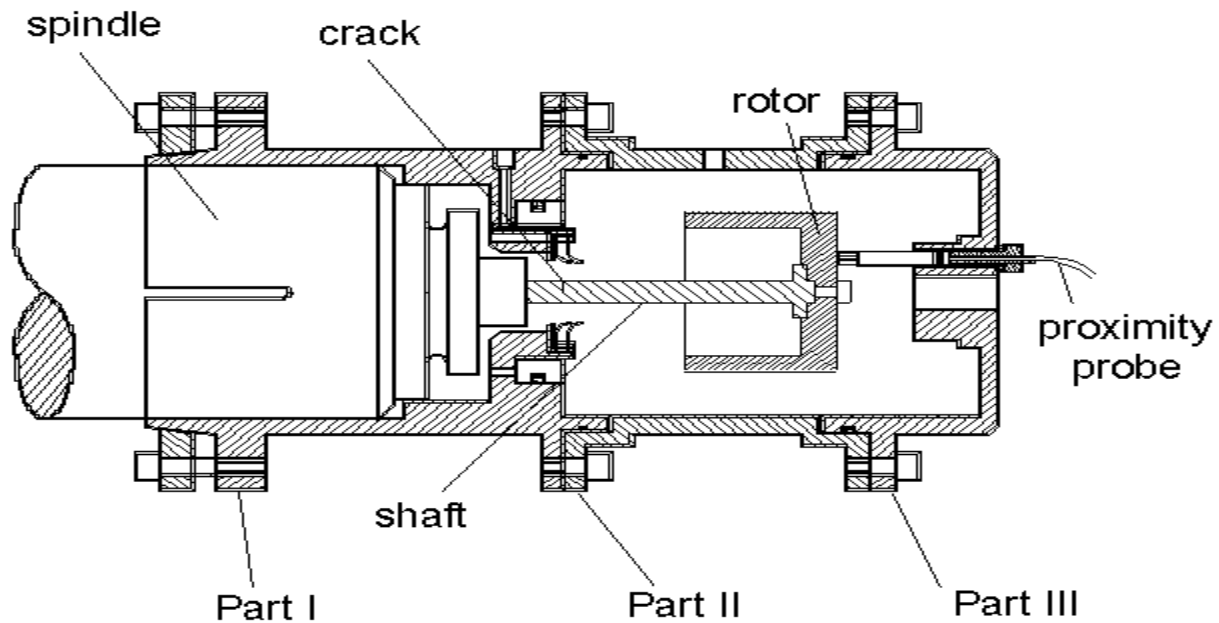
Schematic of a cracked shaft in the same mechanical seal assembly
